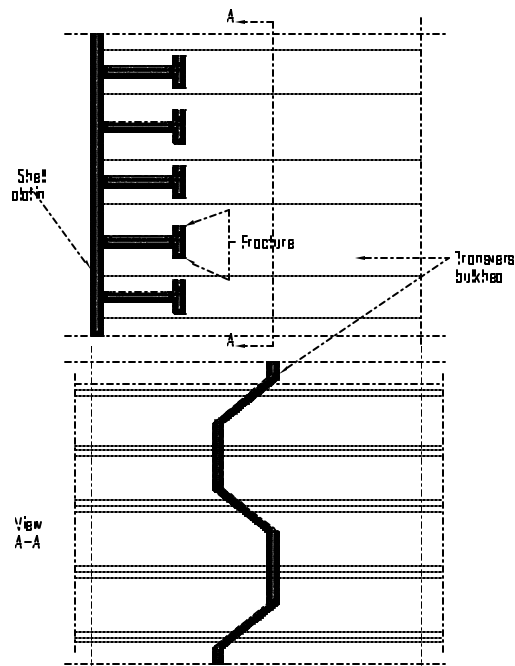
Fractured side shell longitudinal at forward transverse bulkhead.
